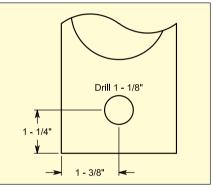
Cut a hole in the rotator housing to clear the potentiometer. This hole is difficult to measure. Drill a small hole after the location is marked to check the placement. Then punch a $11/_8$ inch hole and check for clearance. Finally, epoxy a 1 inch PVC pipe cap over the potentiometer and paint.
